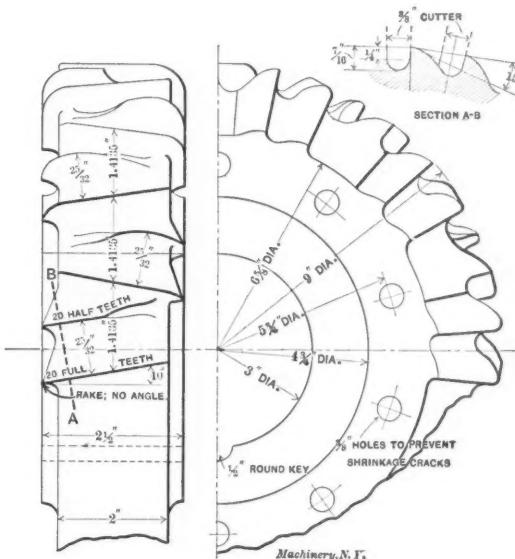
Detail Drawing of New Type of Milling Cutter.
